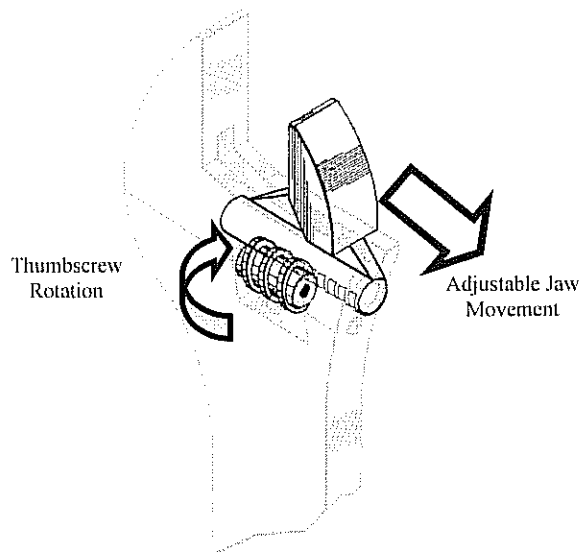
The worm-gear system of the thumbwheel and adjustable jaw.
